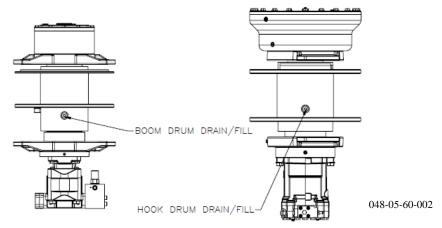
Hook Drum & Boom Drum Oil Drain/Fill Ports
